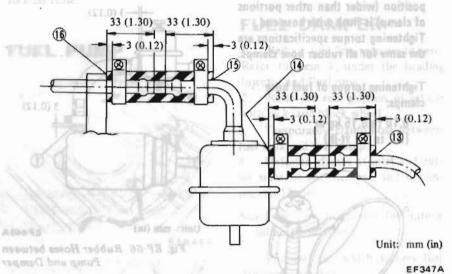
Pressure Regulator to Fuel Pipe Rubber Hose
